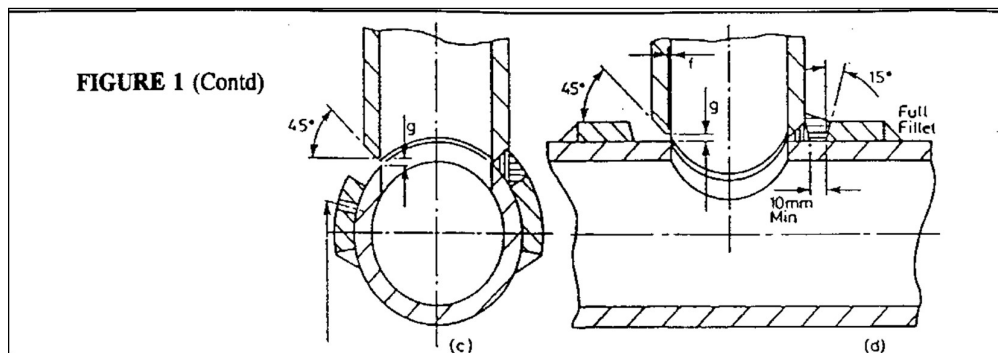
BRANCH REINFORCEMENT DESIGN
